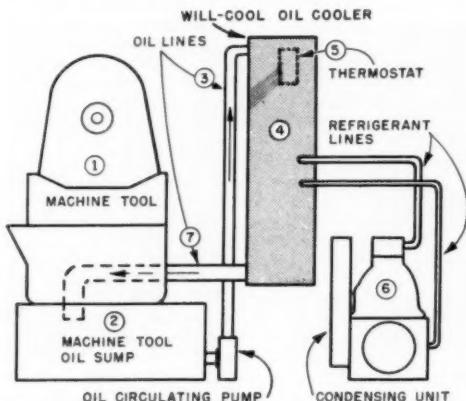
SCHEMATIC APPLICATION OF OIL COOLER FOR COOLING CUTTING OIL WITH SEPARATE PUMPING SYSTEM WHICH CONTINUOUSLY FLOWS CUTTING OIL FROM THE SUMP OVER THE COOLING SURFACE
